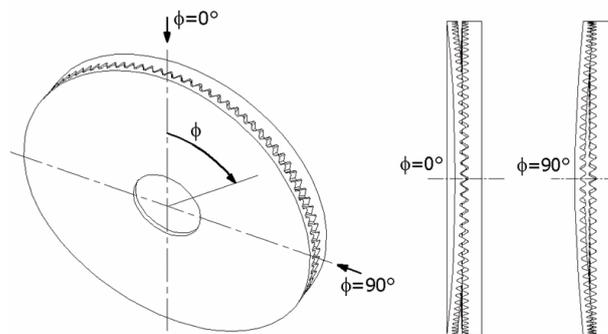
Schematic representation of the engagement in flat-wheel strain wave gearing
